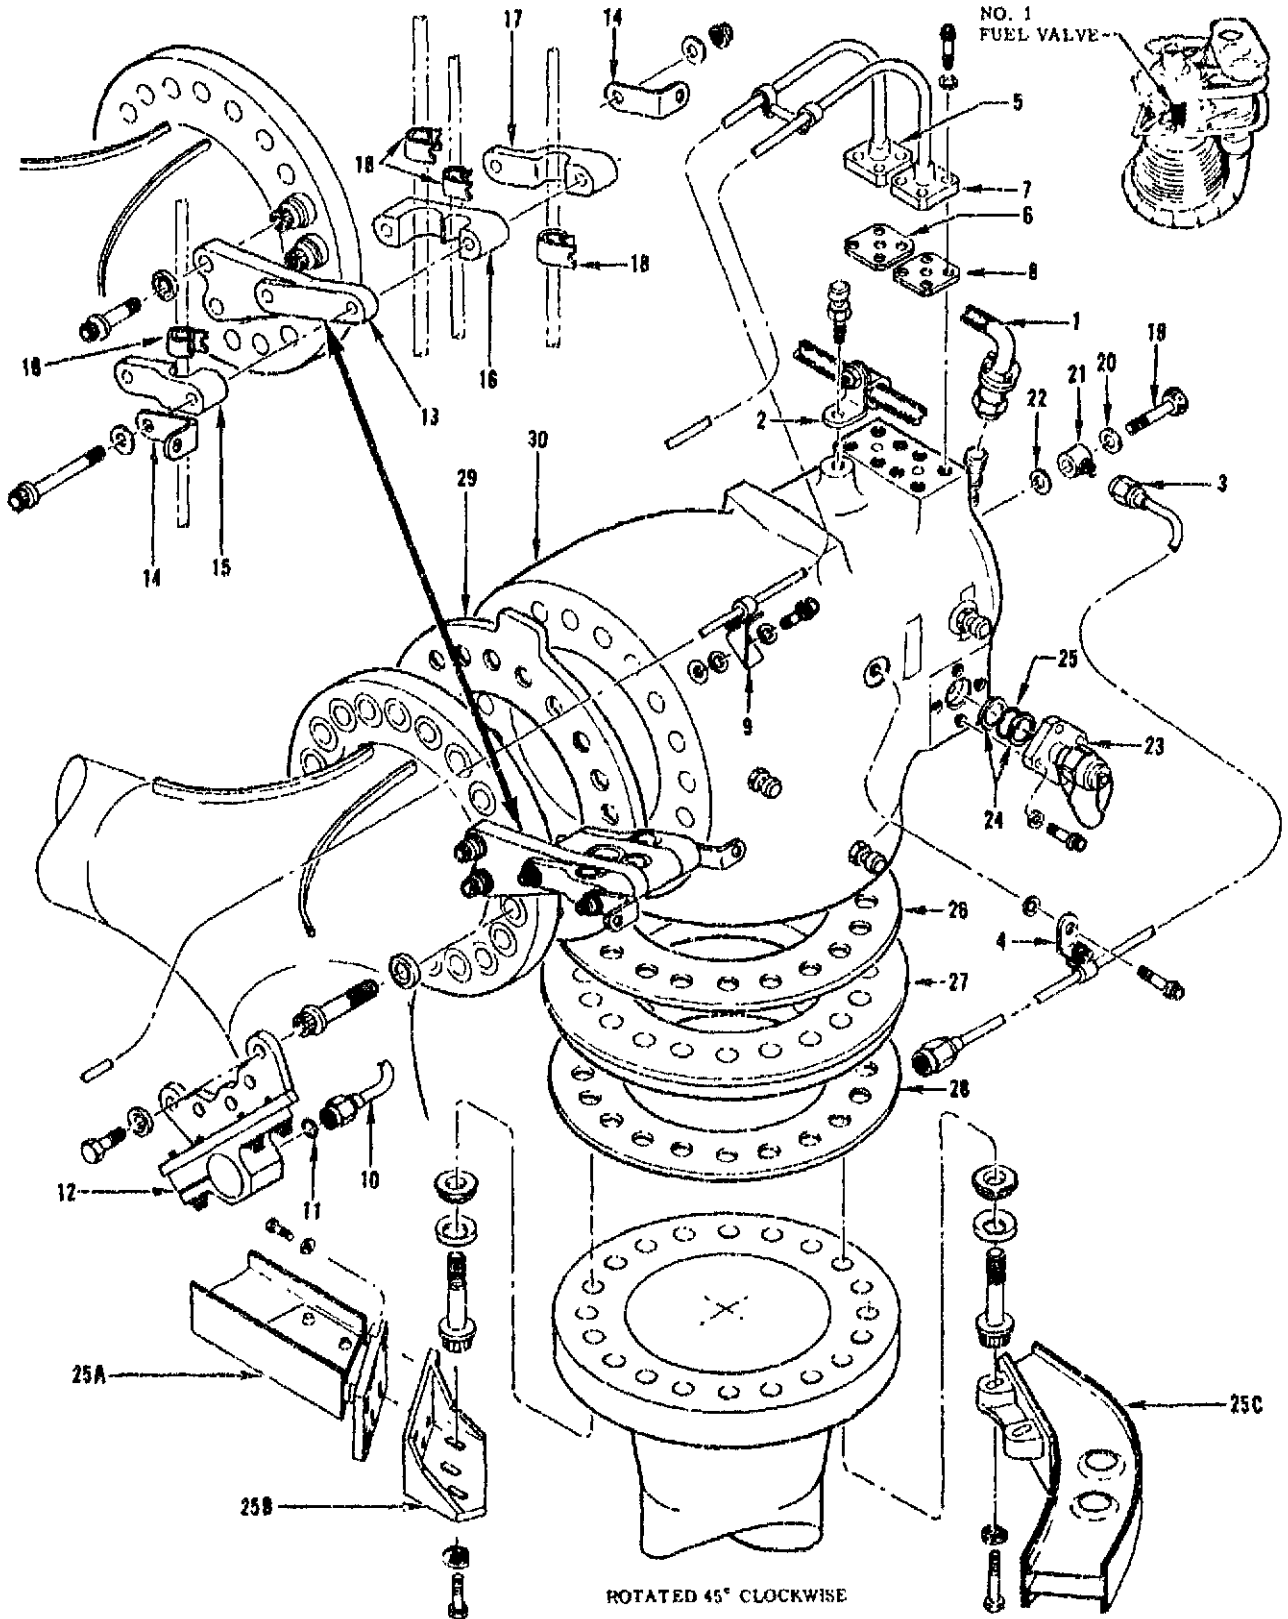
No. 1 Fuel Valve (Sheet 1 of 2)
